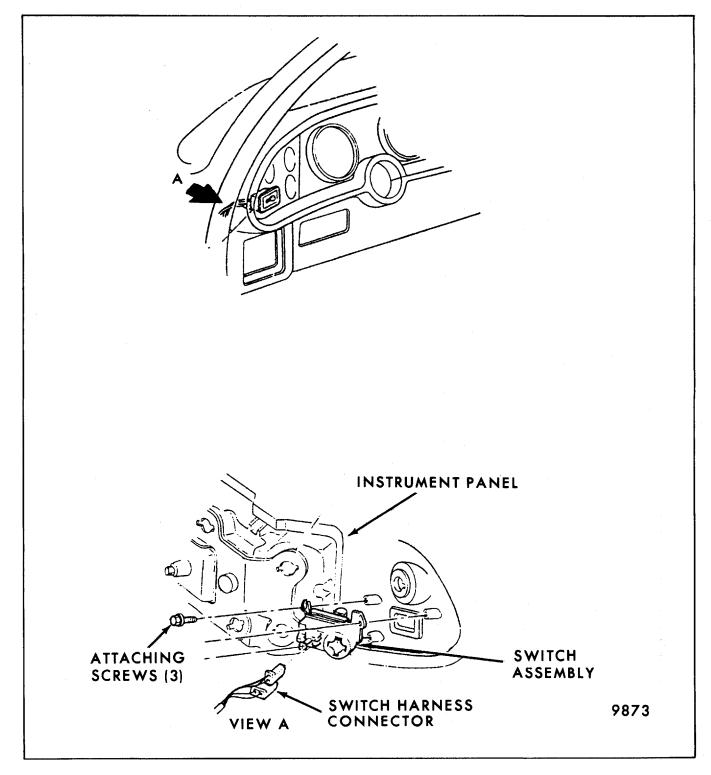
Windshield Wiper Switch Installation - Chevrolet F Styles - Nonpulse Type
